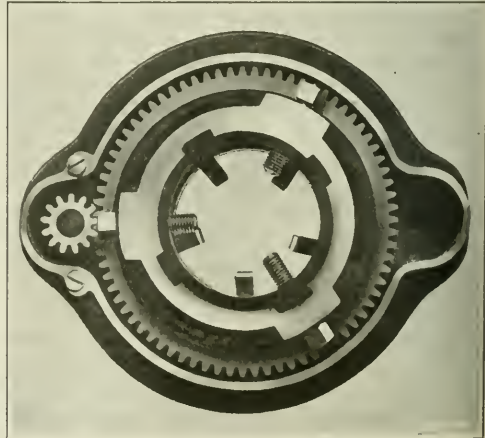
Interior of Geared Die-stock shown in Fig. 2
